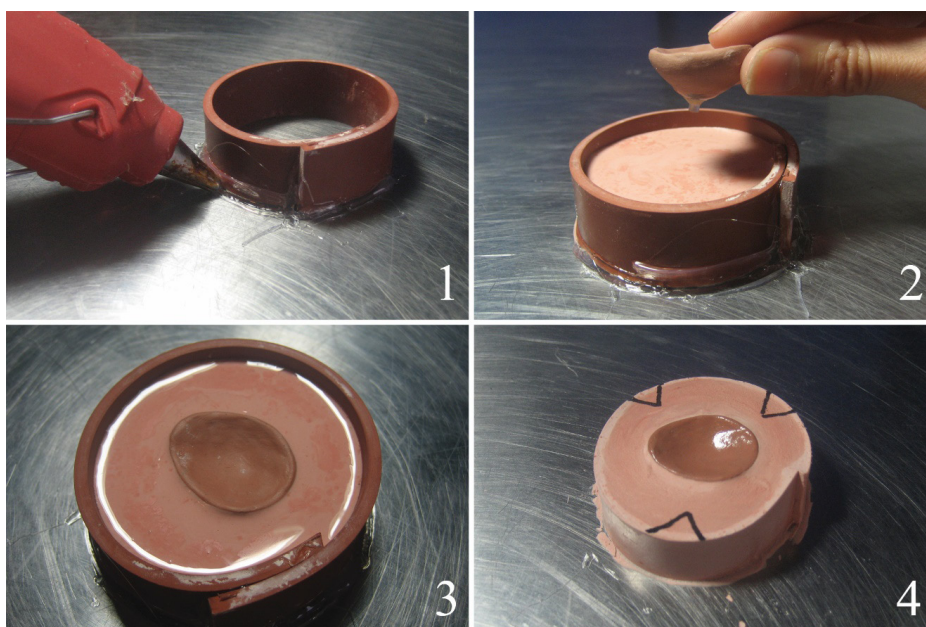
1. Glue form to flat surface. 2. Fill mold with dental stone. 3. Put master eye shape into mold. 4. Cut keys into mold
